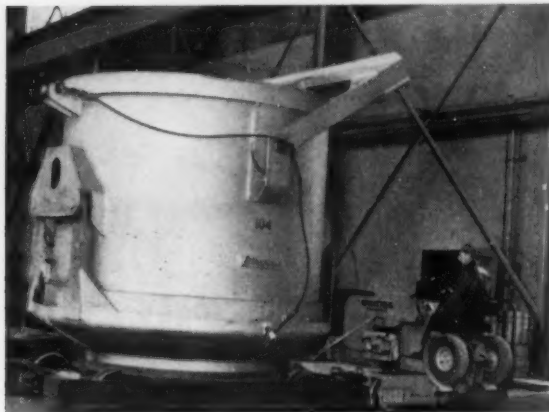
Scrap being delivered to the melt shop. The clam shell bottomed charging bucket is opened with the cable sling shown hanging on the bucket.
